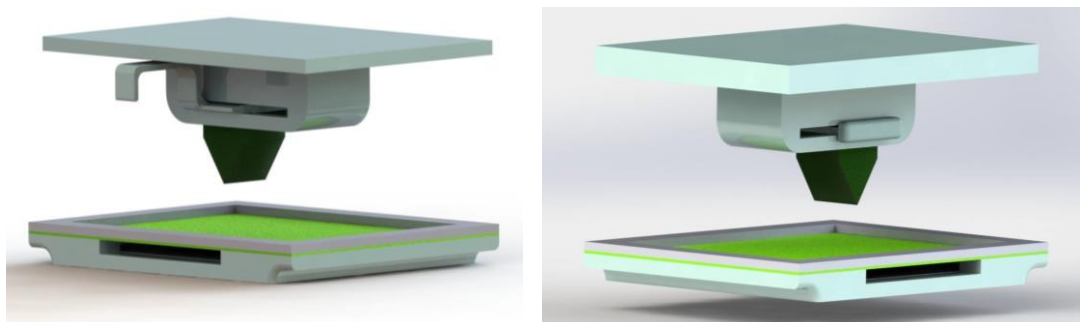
Prototype 2 design in SolidWorks from the front (left) and rear (right) views.
